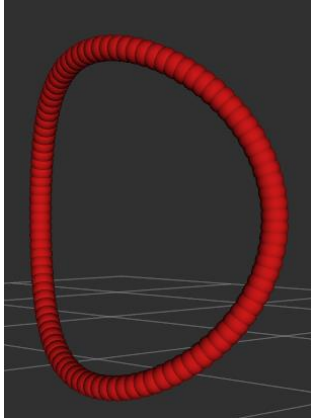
CYLINDER INTERSECTION POINTS (OUTLINE OF SADDLE WELD)
